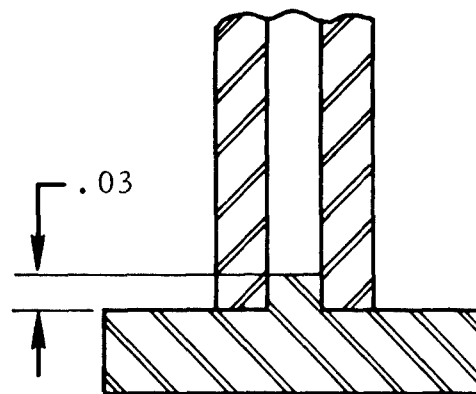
EDM Cap With Wrought Cap Inserted Into Blade Casting.
